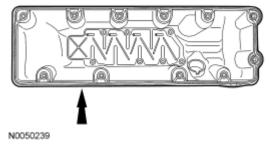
LH Valve Cover Courtesy of FORD MOTOR CO.
